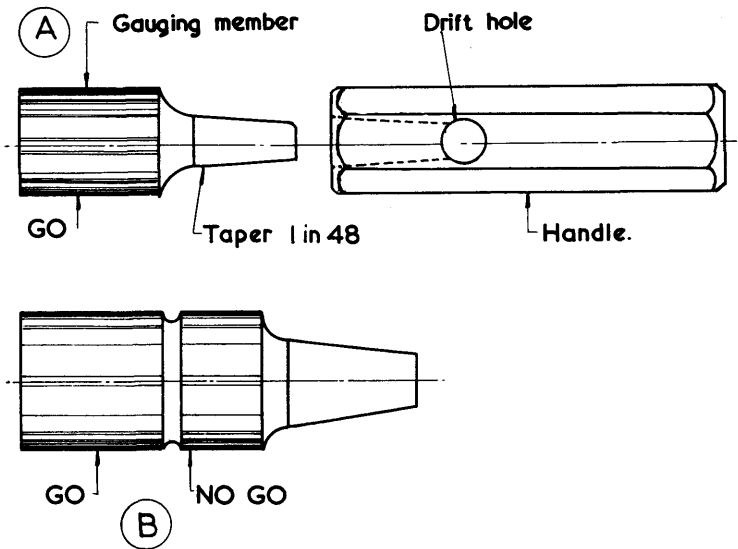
Renewable-end Plug Gauges with Taper Lock.
